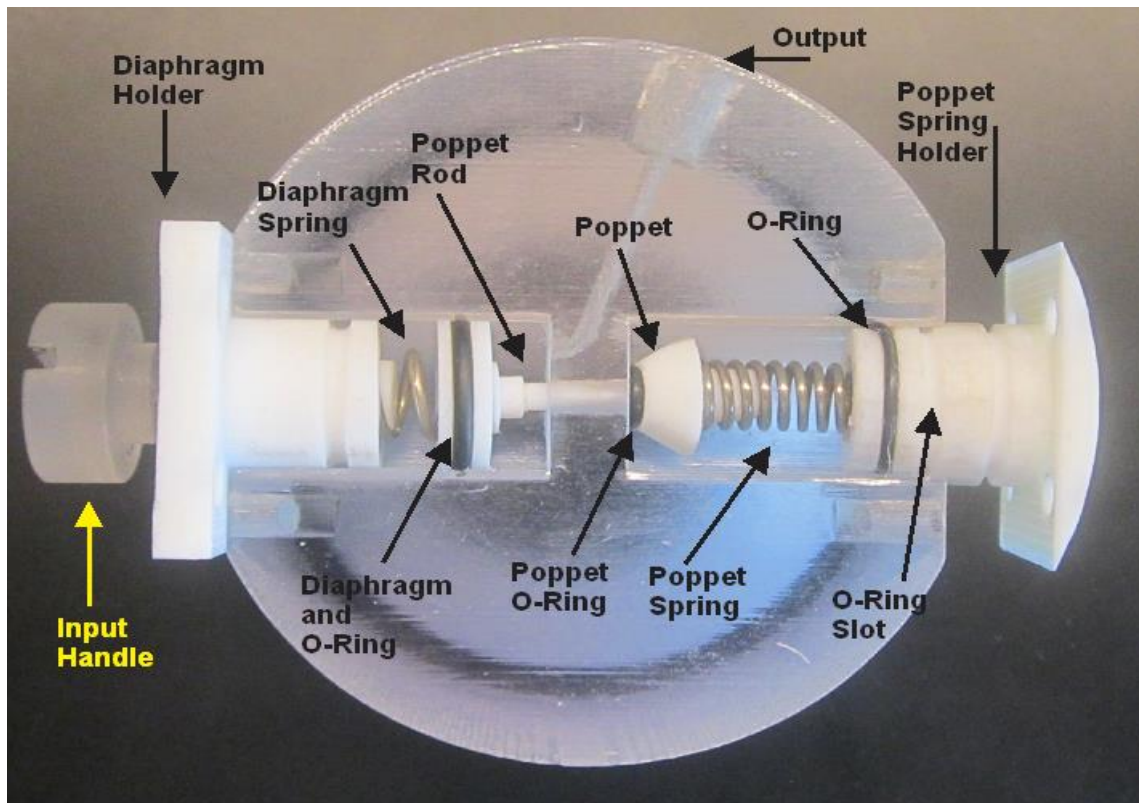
Integrated Pressure Reducer End-Cap Assembly
